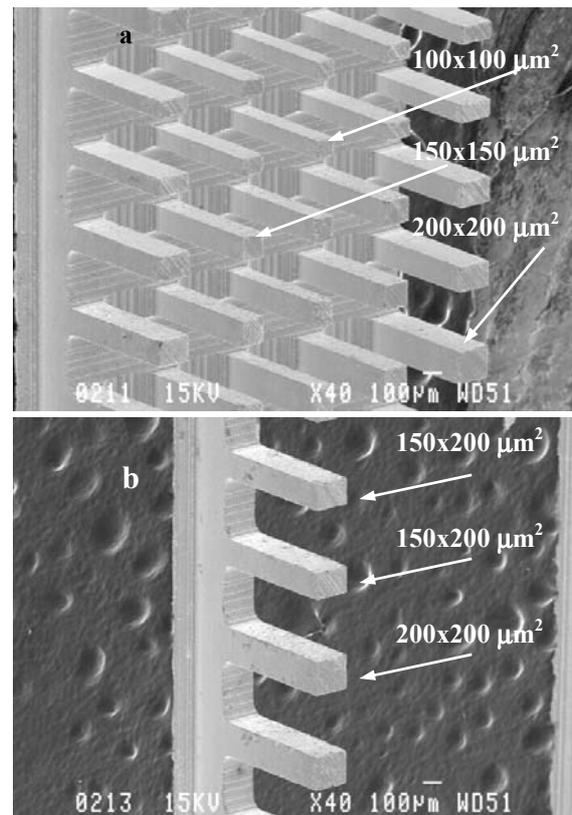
Scanning electron microscope images of N-type (a) and P-type (b) 1 mm thick wafers of extruded alloys after test cutting with a diamond blade.
